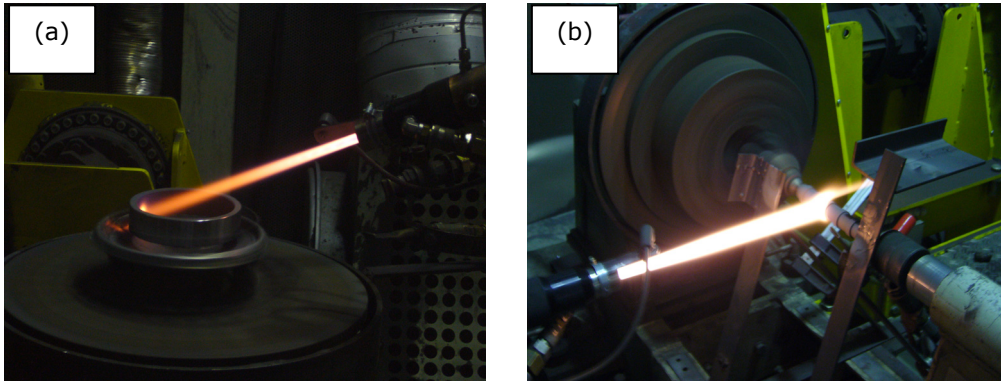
OD-HVOF spraying process: ID coating of the ring specimen (a) and OD of the stationary specimen using a CJS-gun\* (b)
